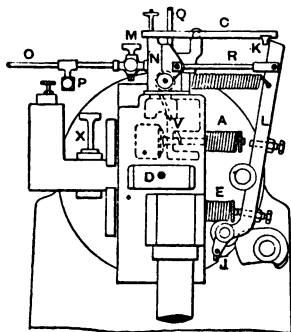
Arrangement of Valves and Levers in Wells' Oil Engine.
